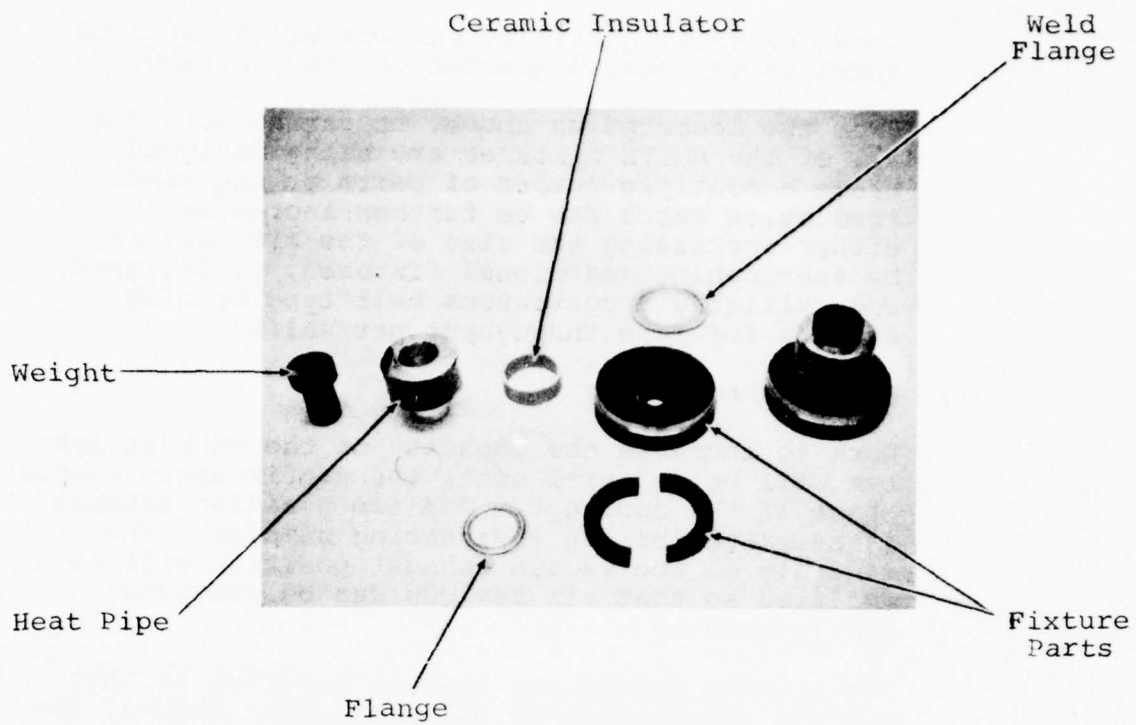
Cathode heat-pipe to ceramic/metal brazing fixture. Four of these fixtures were made. This fixture positions all of the parts shown concentric with the center-line of the heat-pipe. The weld flange and the heat-pipe are positioned by the base of the fixture and the ceramic insulator by the split ring. The flange with the tab is positioned by the heat-pipe. It is this flange which must be weighted during brazing, as described in the text. A loaded fixture is shown on the right side of the photograph.
